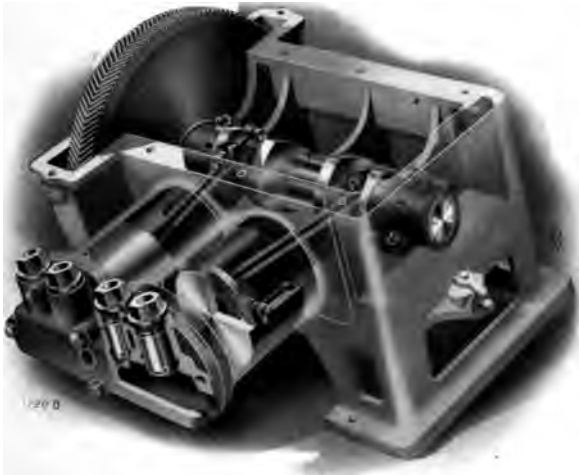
Phantom View of Compressor Base Showing Third Bearing, Crank Shaft, etc.
